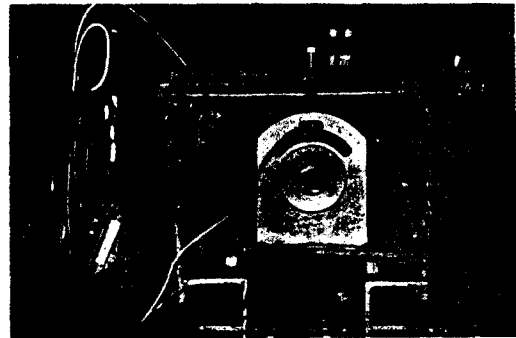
A Picture of the drawing die apparatus which was used in this study.
